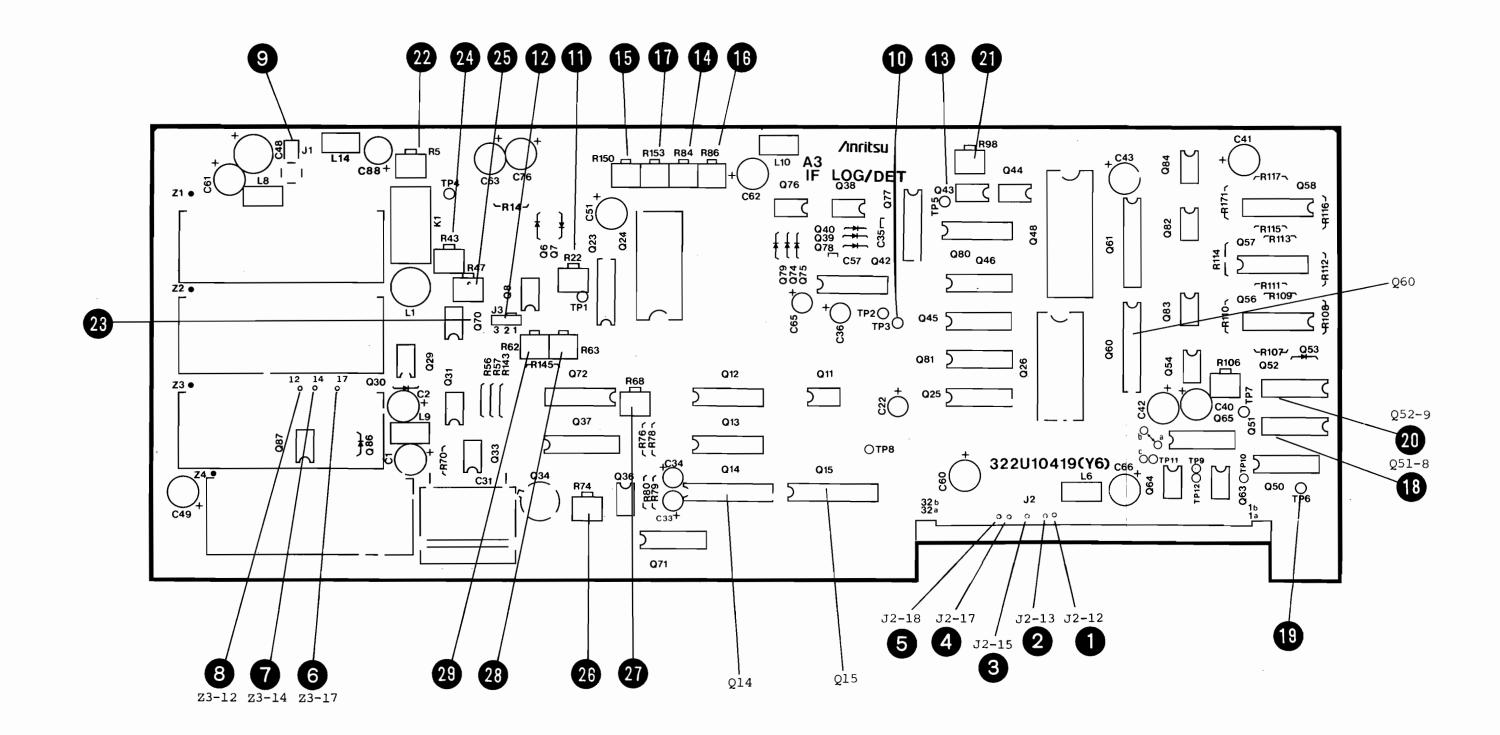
(a) A3 IF LOG/DET PC Board Parts Layout (Parts Side)
